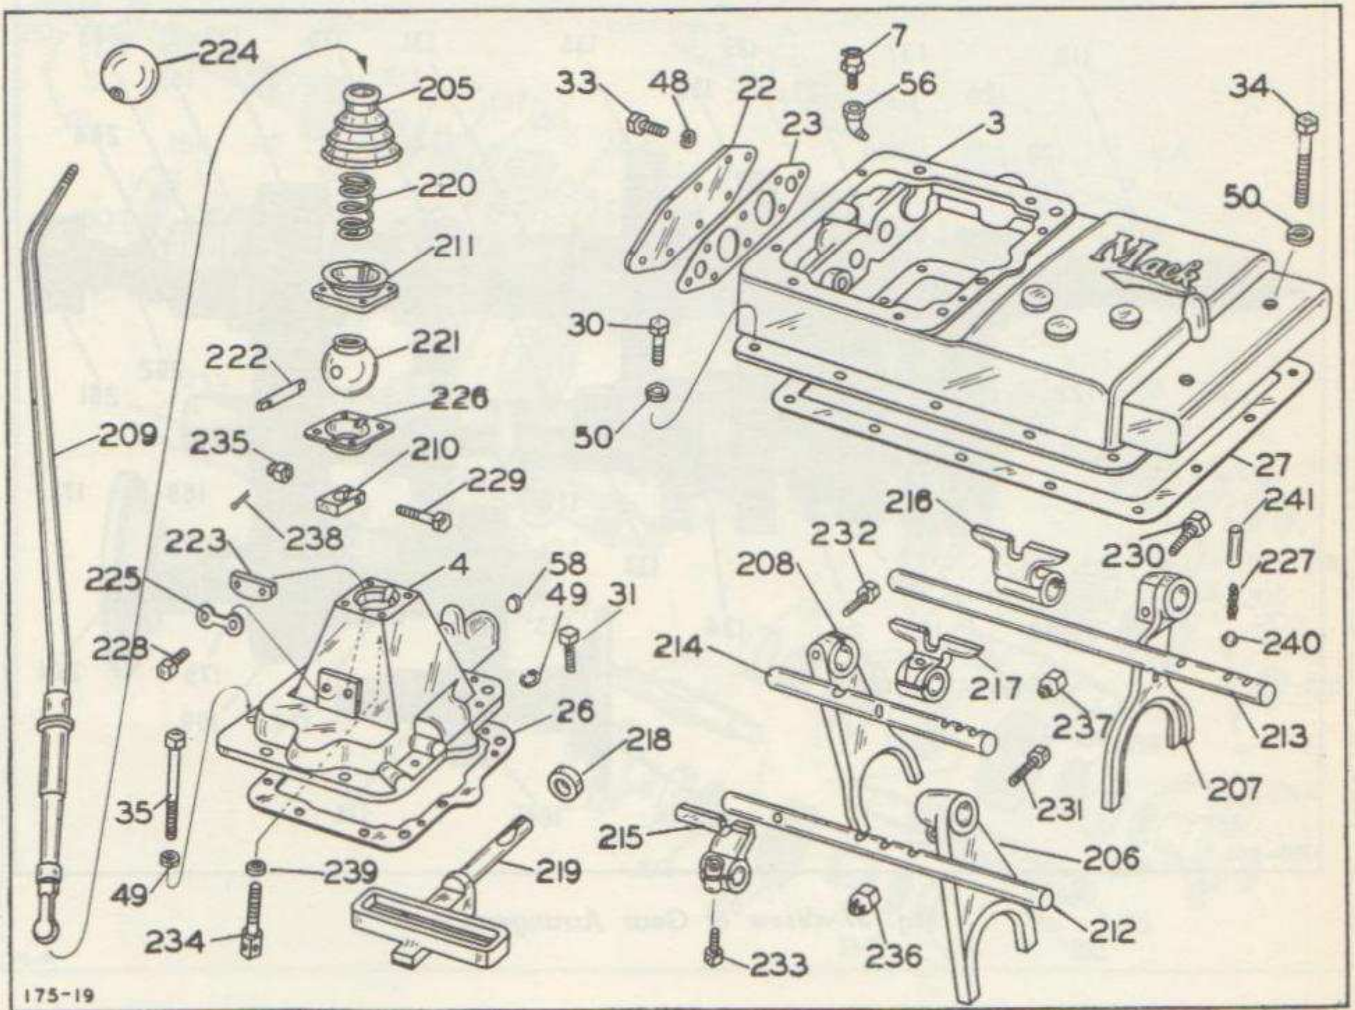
Exploded View of Transfer Case Shifter Cover Assembly
